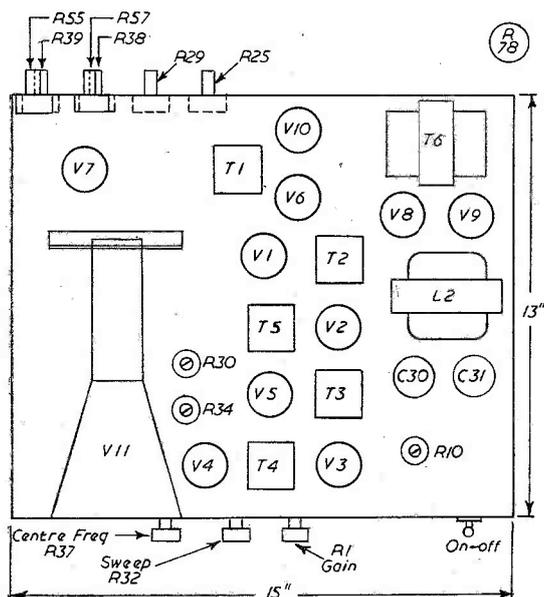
Plan view of the general chassis layout, showing how the main parts can be disposed. Almost any convenient form of construction can be adopted.
